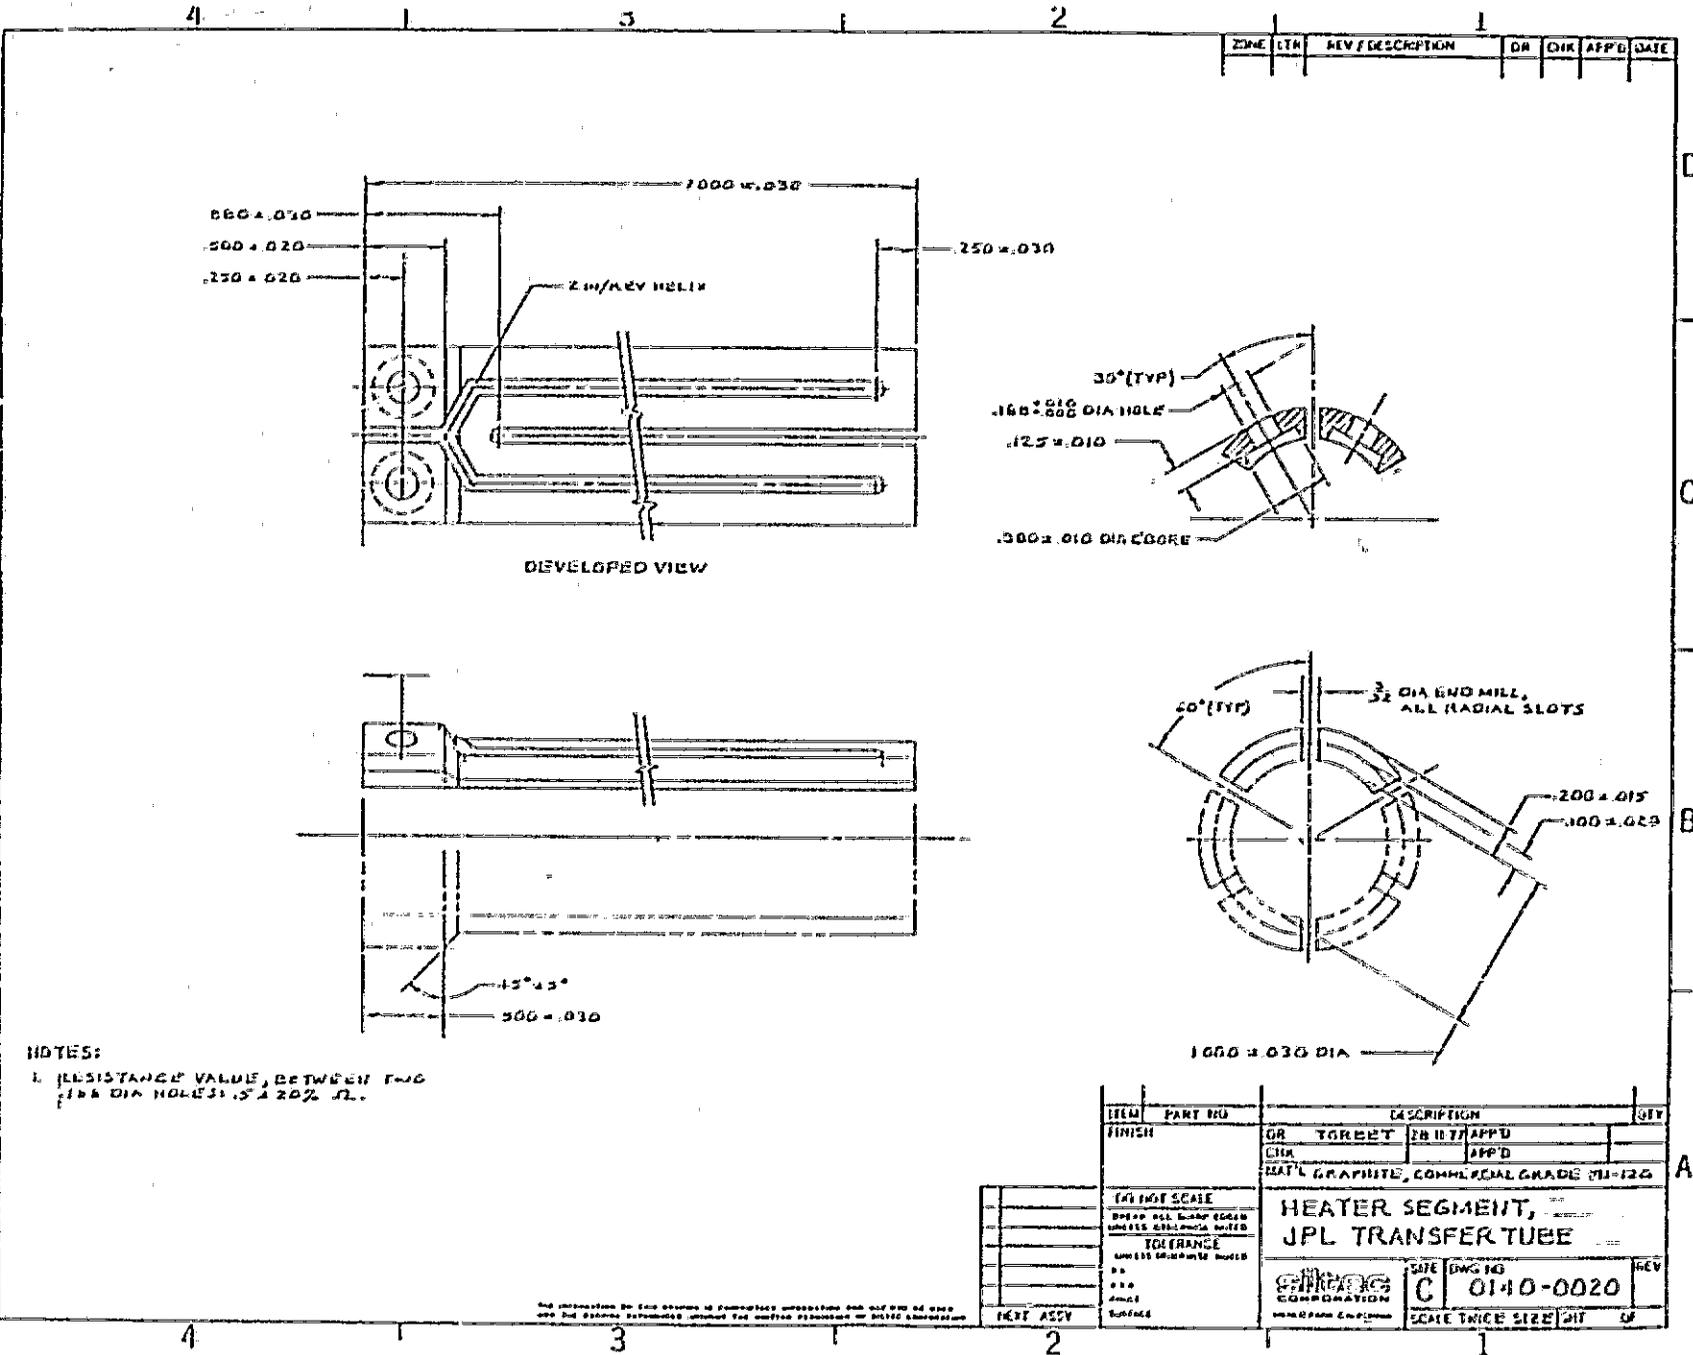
Heat segment for use with the molten silicon transfer tube assembly.
